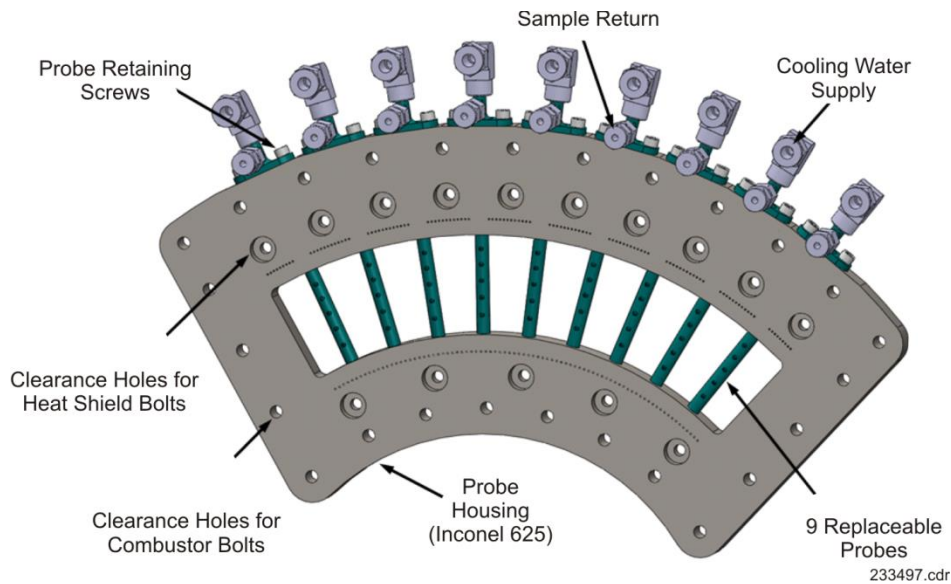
Forward-Looking-Aft (FLA) View of Piccolo-Probe Assembly
